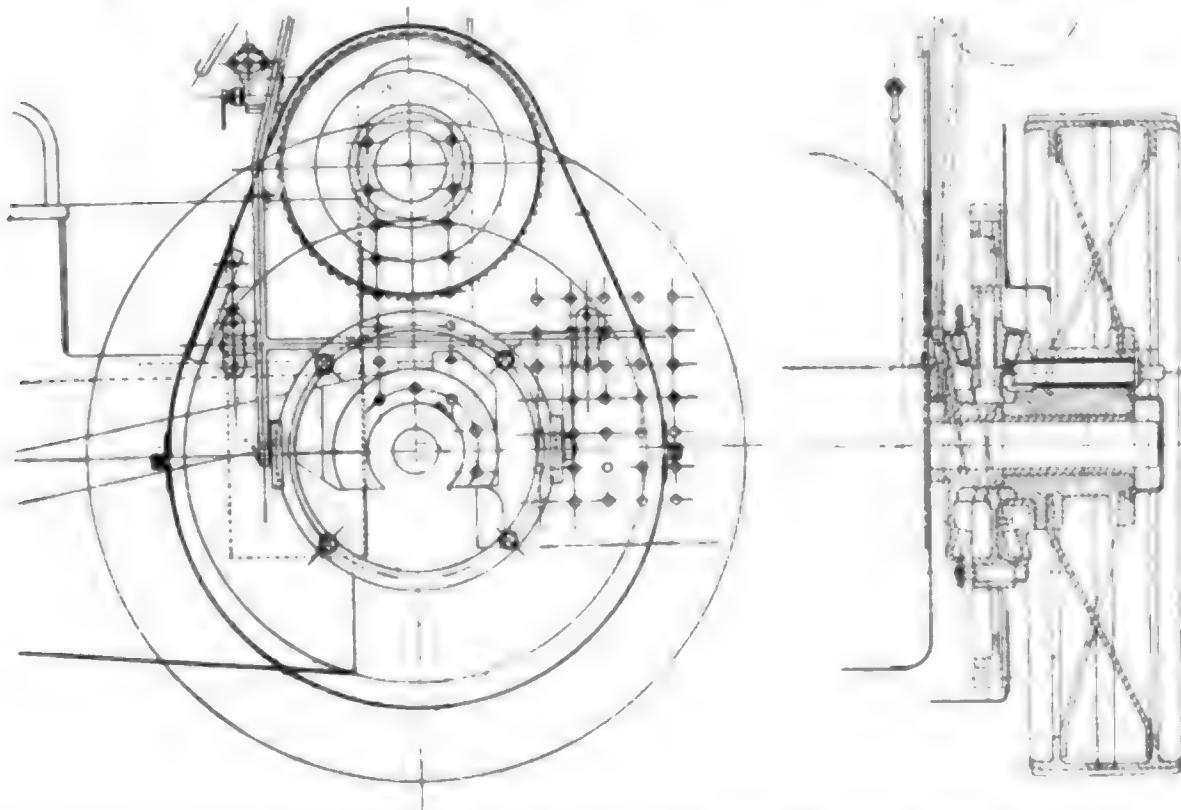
, 19 AND 20.—COMPENSATING GEAR LOCKING PLAN. BY MESSRS. C. BURRELL AND SONS, LTD. OF THETFORD.
